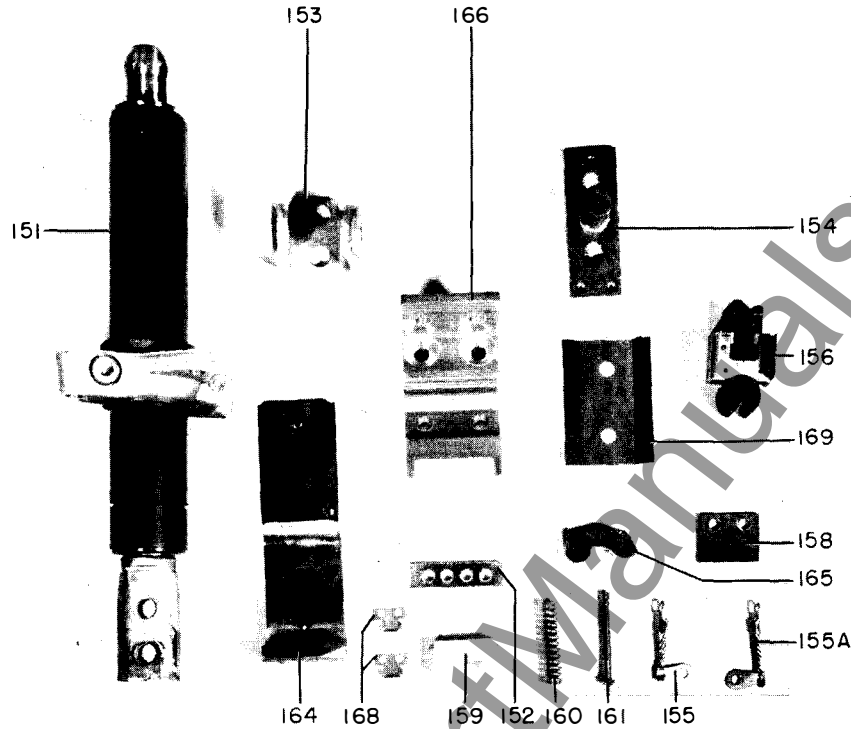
G Component Parts - 1200 Amp. Rear Bushing
